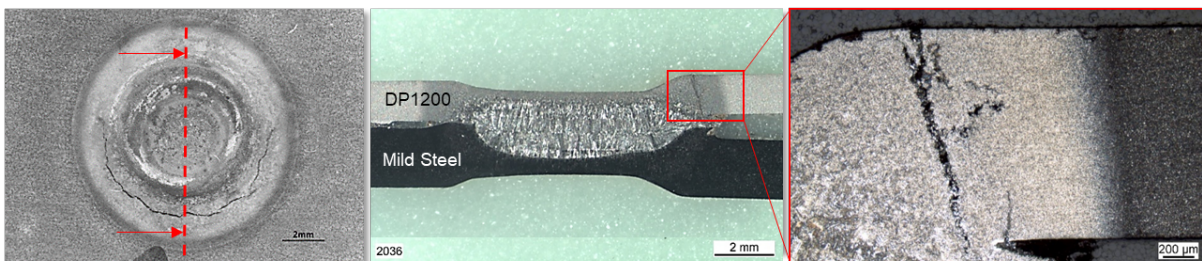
Exemplary results of visual inspection and metallographic cross-sections: Left: Macroscopic surface view of cracked spot weld; Middle: Metallographic cross-section of same spot weld in lower magnification; right: Detail from same metallographic cross-section in higher resolution and magnification
